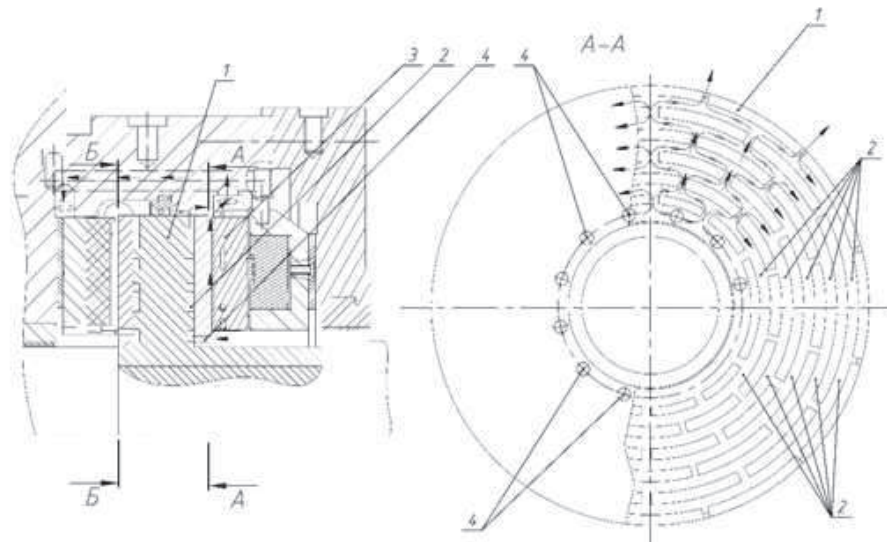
Axial bearing with inner cooling of the thrust collar: 1 – thrust collar, 2 – cooling channels, 3 – pad, 4 – supplying channels.
